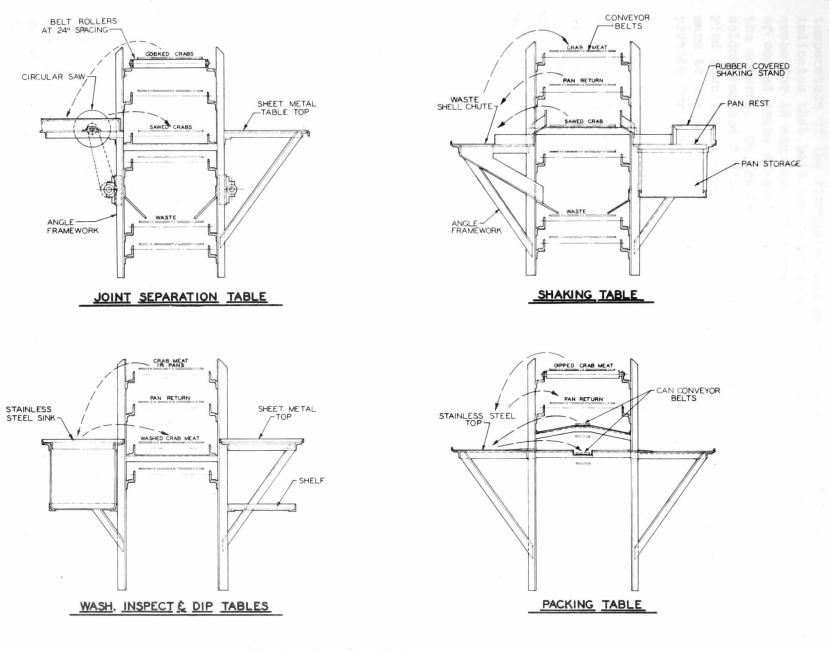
DETAIL SECTION DRAWINGS OF CRAB LINE
